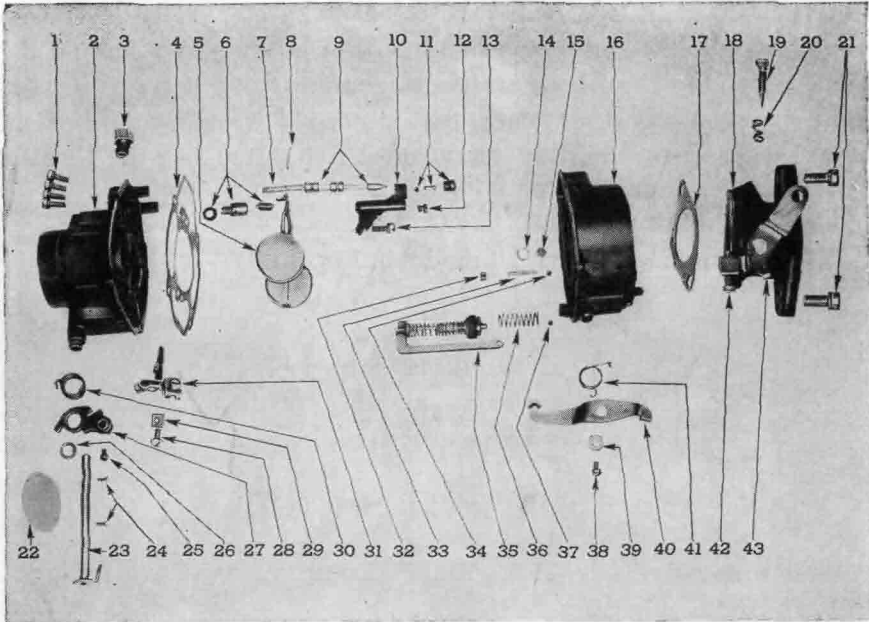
Disassembled view of one type of single-barrel carburetor. (Chevrolet Motor Division of General Motors Corporation)
